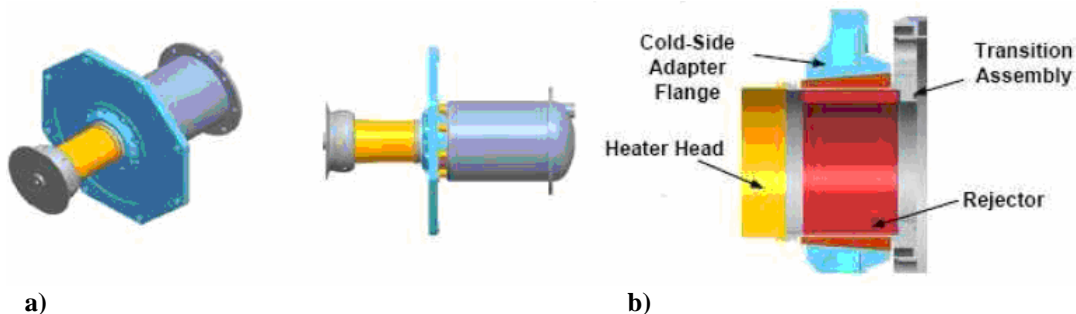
(a) Stirling Converter<sup>1</sup> with Heat Collector and Cold-Side Adapter Flange. (b) Cold-Side Adapter Flange.
